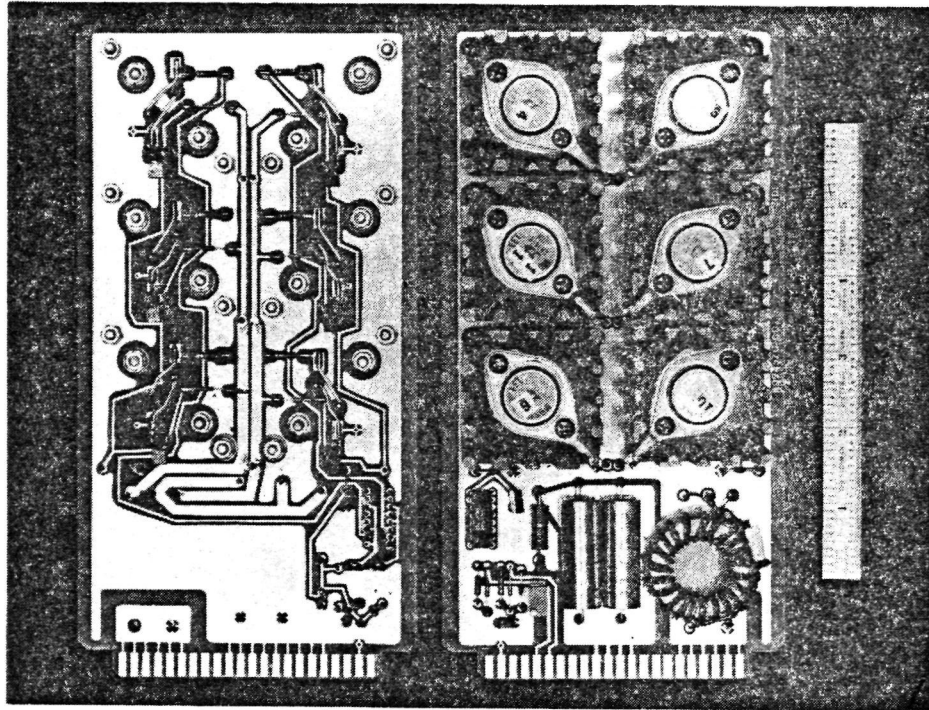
Transistor Base Drive Power Oscillator Circuit Card Assembly
